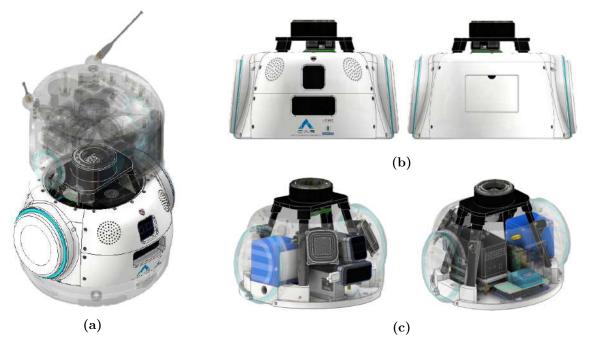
Robot body sub-assembly: (a) Location in the main assembly, (b) External front and back views, (c) Internal detail views.
